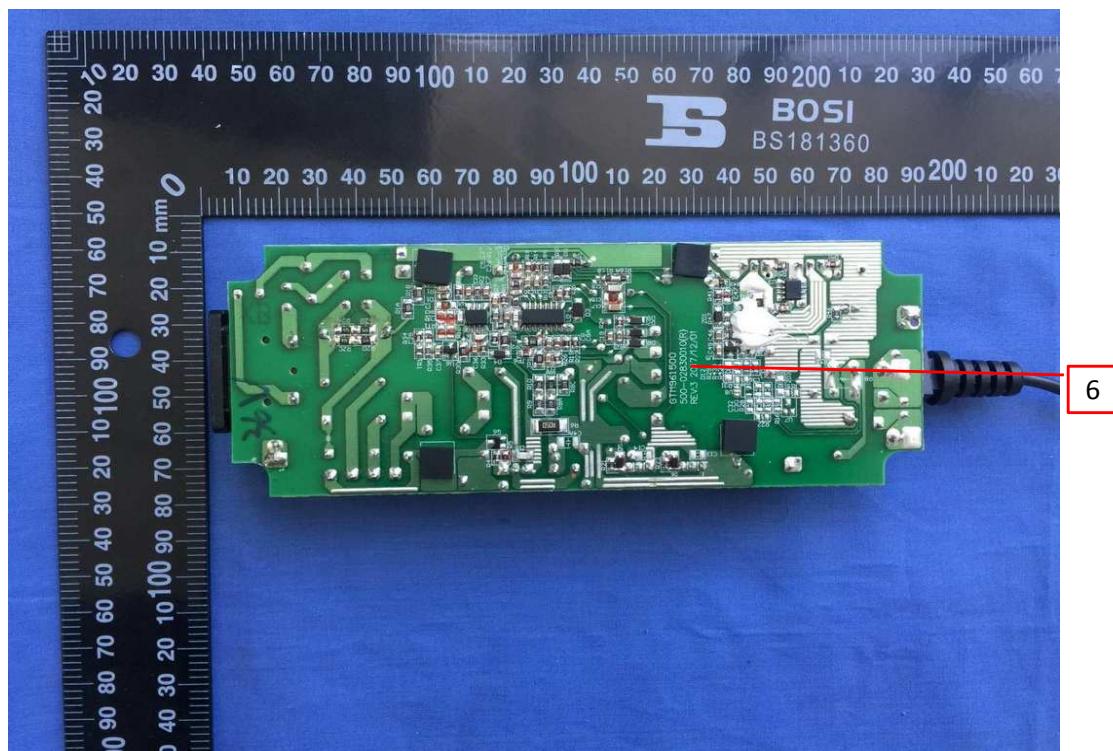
PCB Bottom Side (12.0-36.0V model, Class I)
